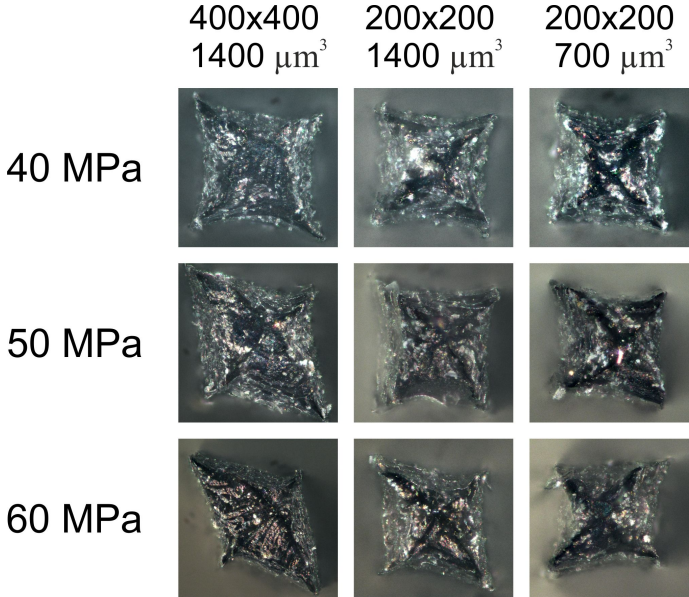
Fracture surfaces of the miniaturized specimens tested at stress 40 MPa, 50 MPa and 60 MPa in three different specimen sizes, similar fracture surfaces were observed.
